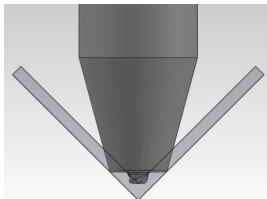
The picture shows how the Shoulder would cut into the weld piece when using a normal FSW tool trying to weld a corner weld
